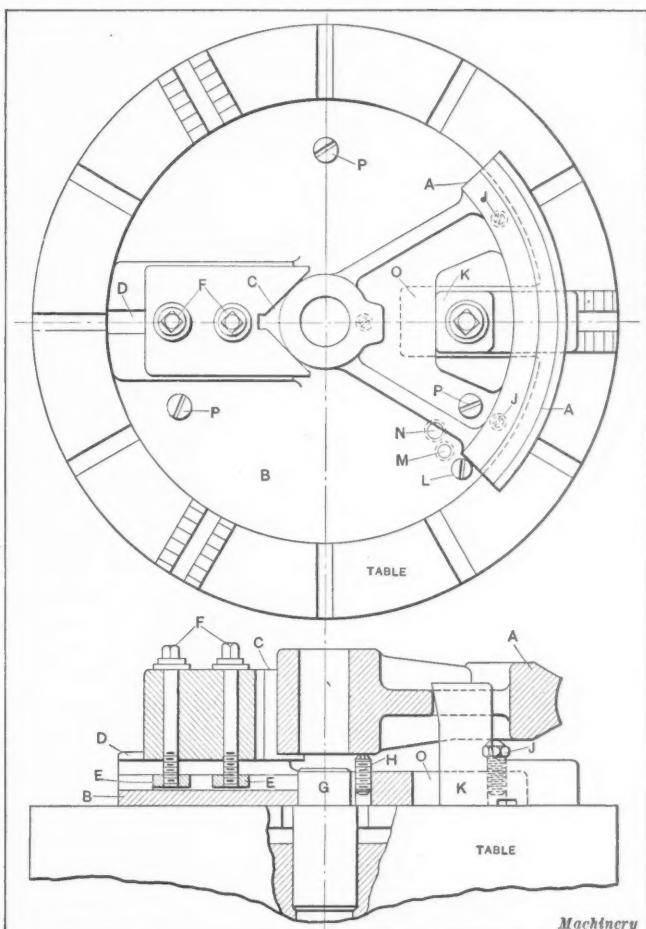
Adjustable Fixture for holding Three Sizes of Bronze Worm-gear Sectors
